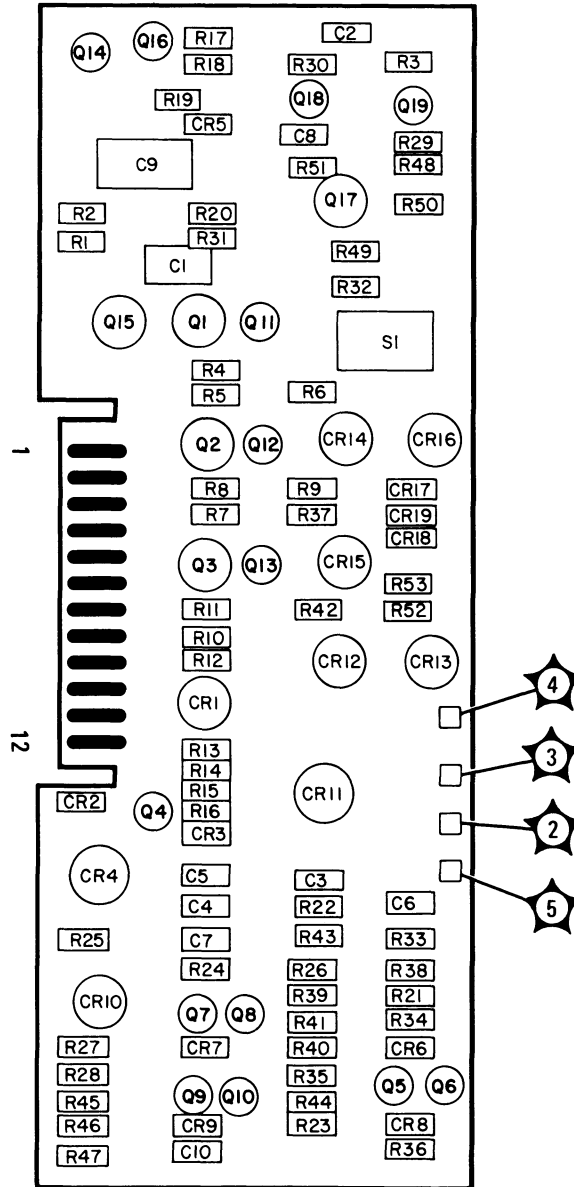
Sense Amplifier Assembly A14 Parts Locations
